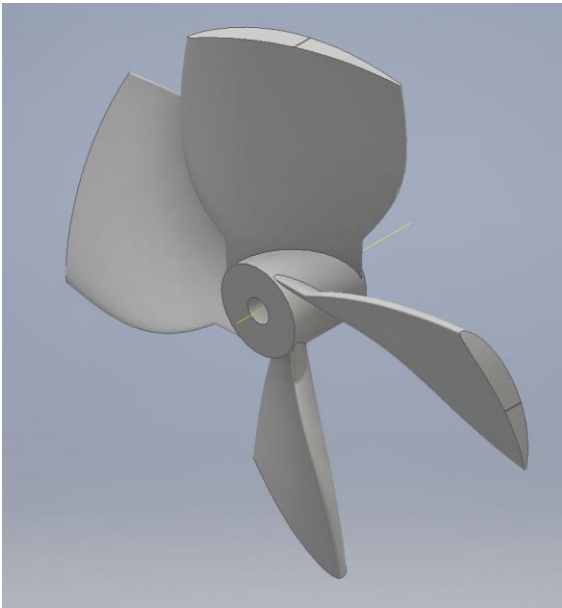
Front view of 4 cm airfoil wind turbine 3D model
